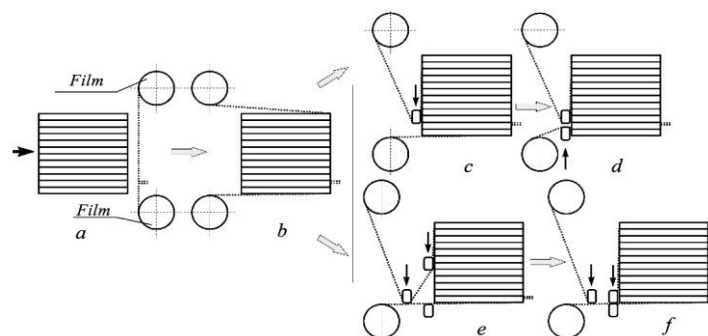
Technological scheme of forming a package of plates: a – forming the package; b – feeding, c – wrapping with a film; d – pressing and welding; e – wrapping with the film and clamping its ends; f – tightening and welding of the package
